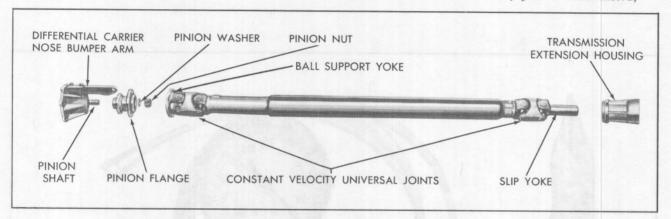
Propeller Shaft Except "75" and Commercial
